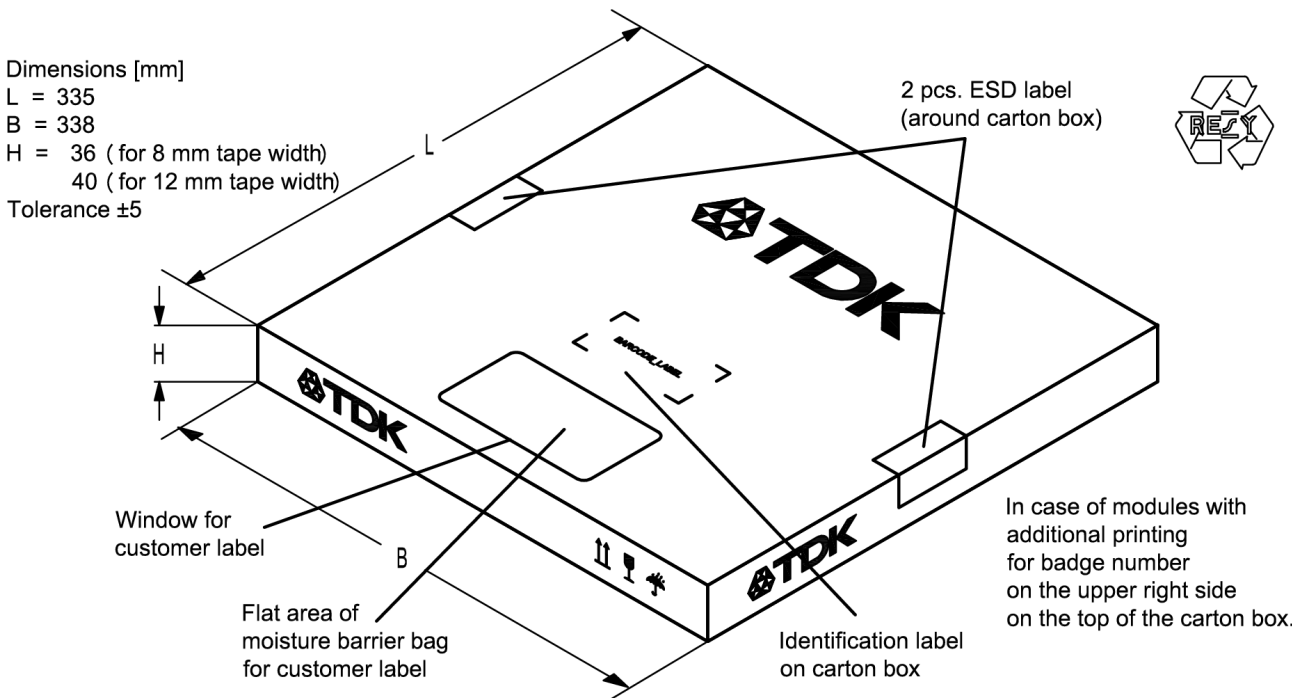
Drawing of folding box for reel with diameter of 330 mm.
